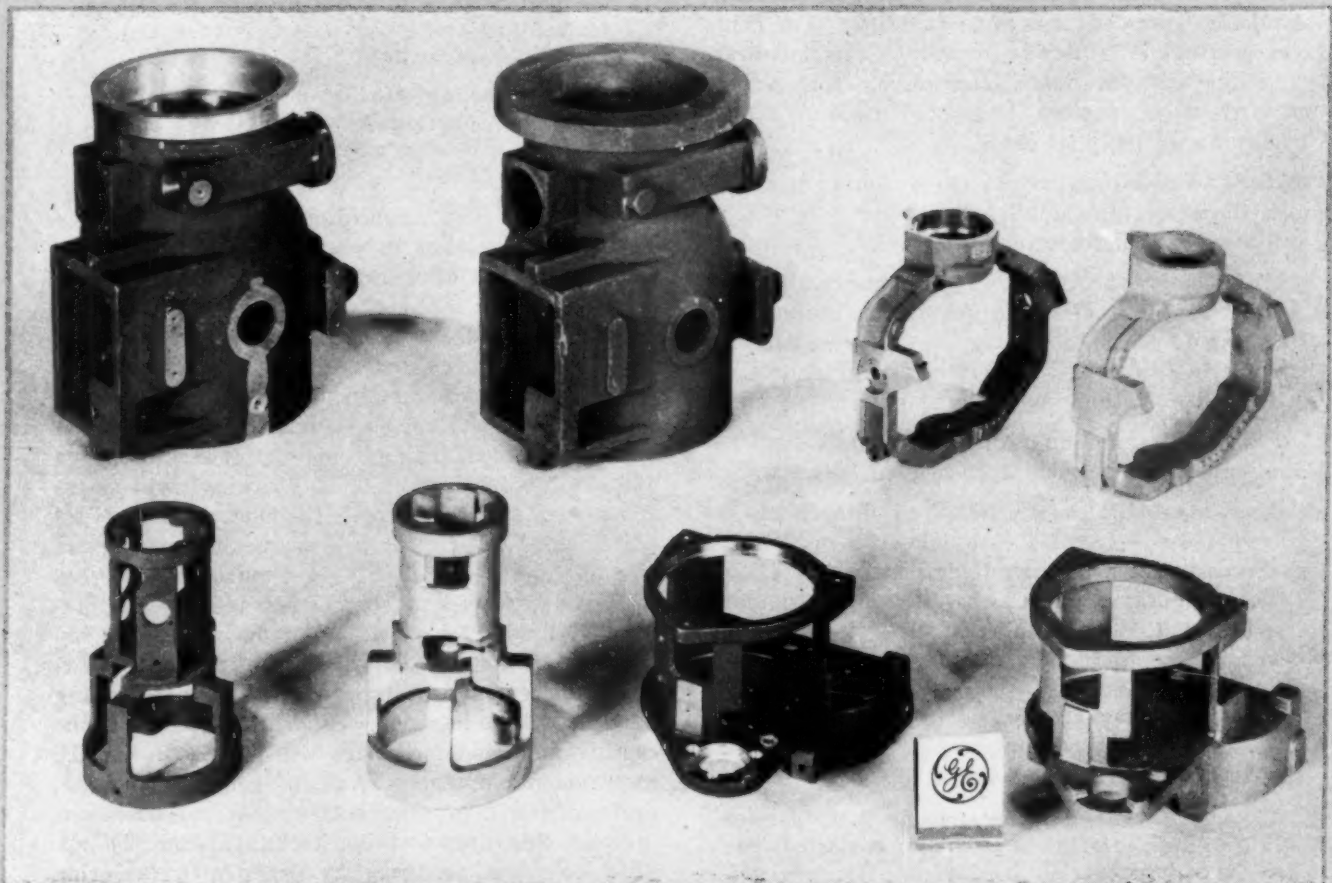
Above—Typical instrument investment castings discussed showing the as-machined part on the left in each instance
